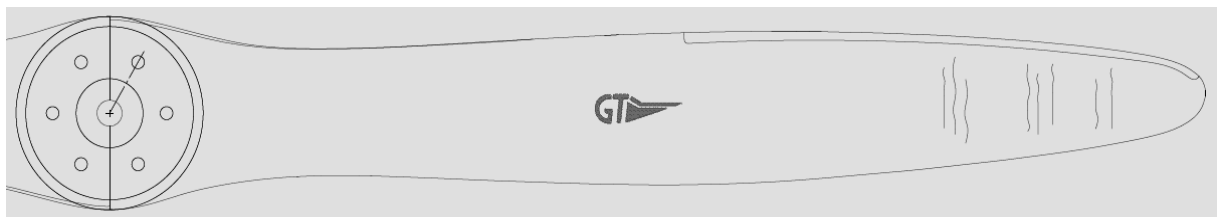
TRANSVERSAL CRACKS AT THE BLADE'S TIP
